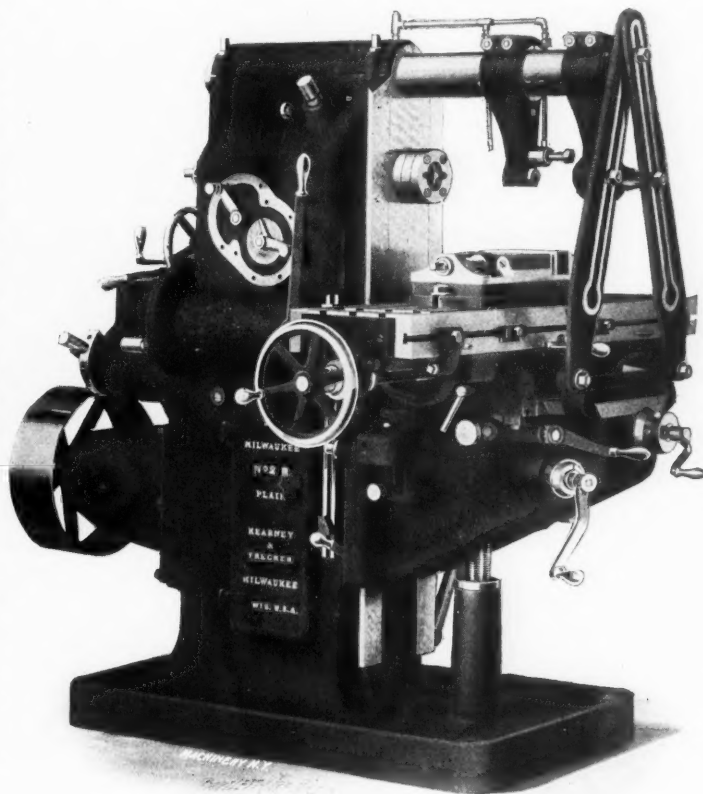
Milwaukee No. 2B Plain Milling Machine, with Geared Drive and Feed
